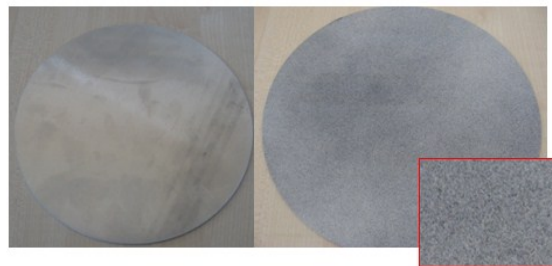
FLD test specimen and stoachastic pattern on the sheet material
